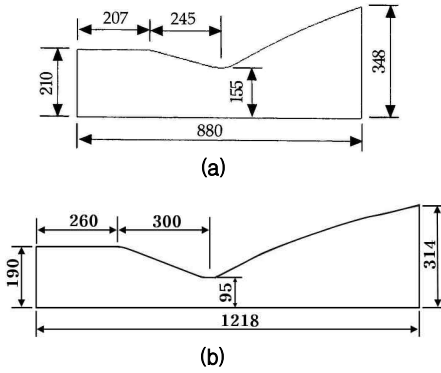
Geometry of sample rocket combustion chamber; (a) KSR-III engine and (b) KSLV-I candidate engine (unit: mm)
